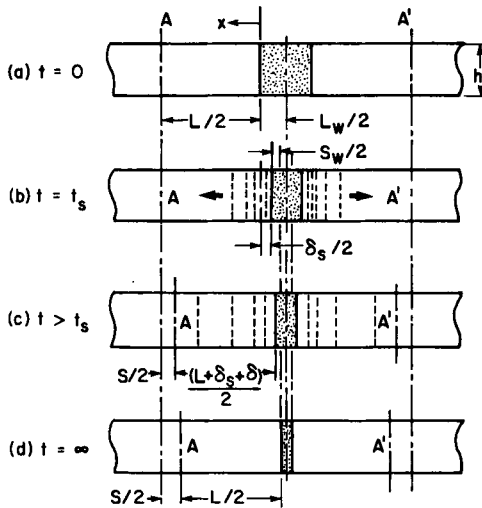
Schematic presentation of a transverse shrinkage of a butt weld in a single pass.
